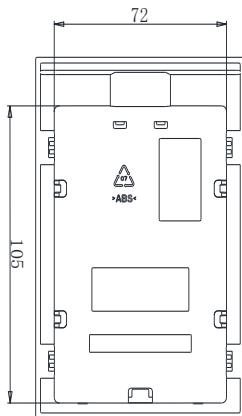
Dimensions of the mounting opening of the external lead keyboard 2
